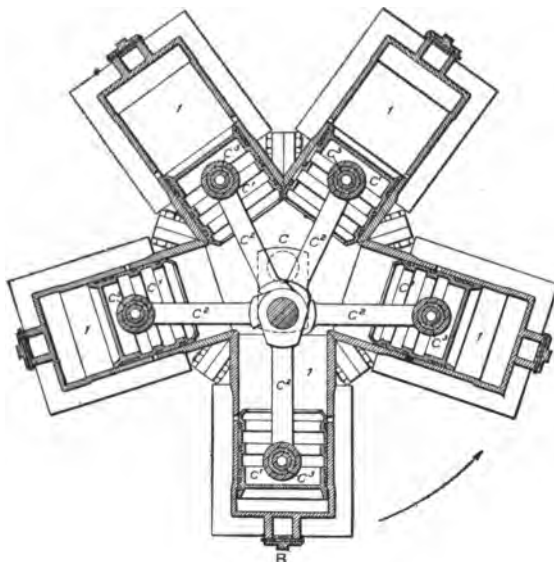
Diagram Showing Operation of Adams-Farwell Rotating-Cylinder Engine.
